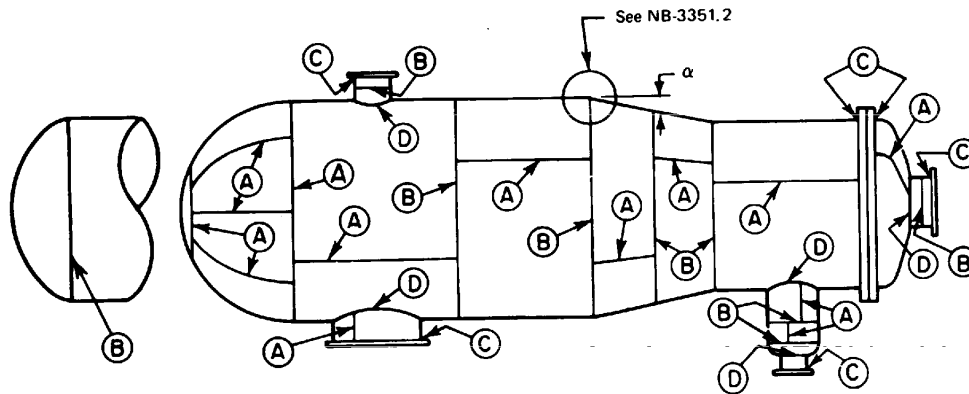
WELDED JOINT LOCATIONS TYPICAL OF CATEGORIES A, B, C, AND D
